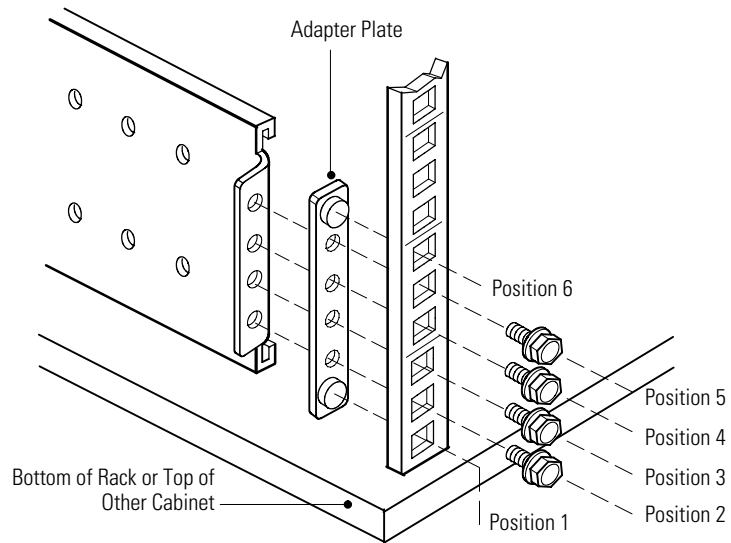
Securing the Rear Rail (Right Rail Assembly Shown)
